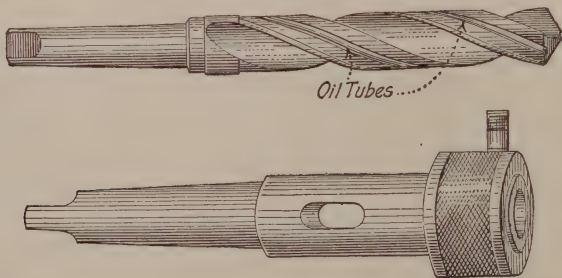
Oil-tube drill and oil-feeding socket. (Courtesy of Cleveland Twist Drill Company.)
